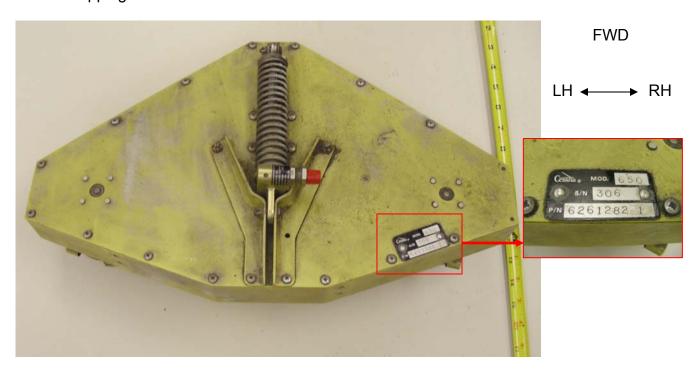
View of the upper surface of the 6261282-1 Box Assy-Spoiler Mixer, s/n 306 in the condition in which it was received.
